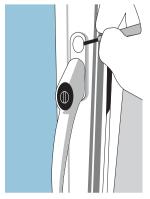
Carefully remove top cover cap using a small flat headed screwdriver.
